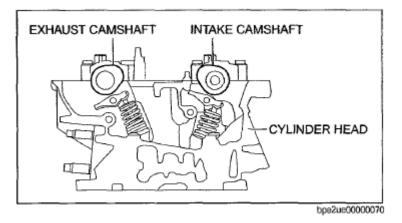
Identifying Cylinder Head, Intake And Exhaust Camshaft
